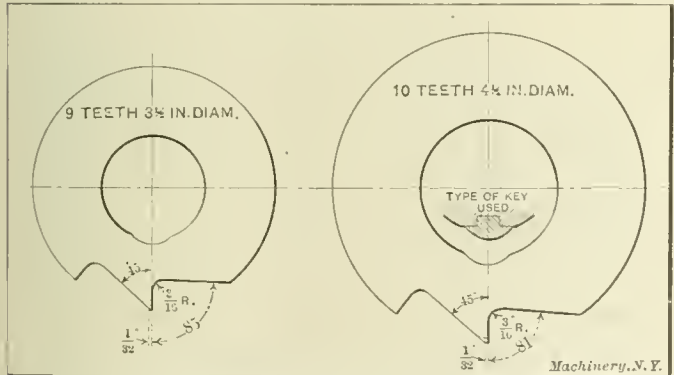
Form of Spiral Milling Cutters now used by the Cincinnati Milling Machine Co., showing Wide Spacing, Large Arbor, and Form of Key Recommended
